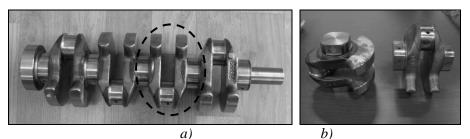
A crankshaft sample for testing procedure: *a*) Bending test sample; *b*) Cut-off section for Torsion test.
